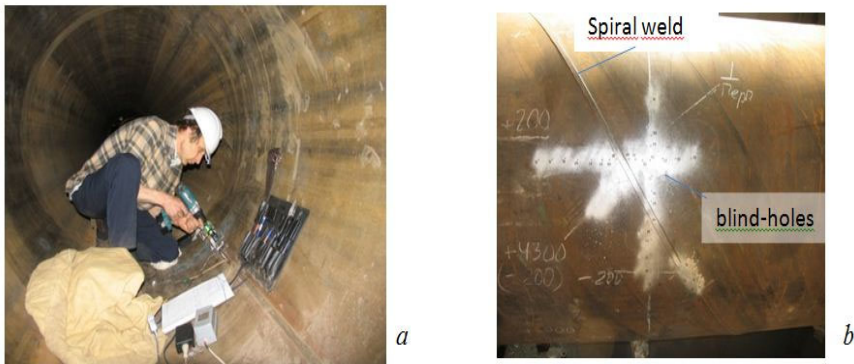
The studies of the residual stresses in industrial conditions: *a* - drilling of a blind-hole in a weld in a gas pipe of large diameter, *b* - disposition of blind holes in a neighbourhood of a spiral weld on an external surface of a pipe
